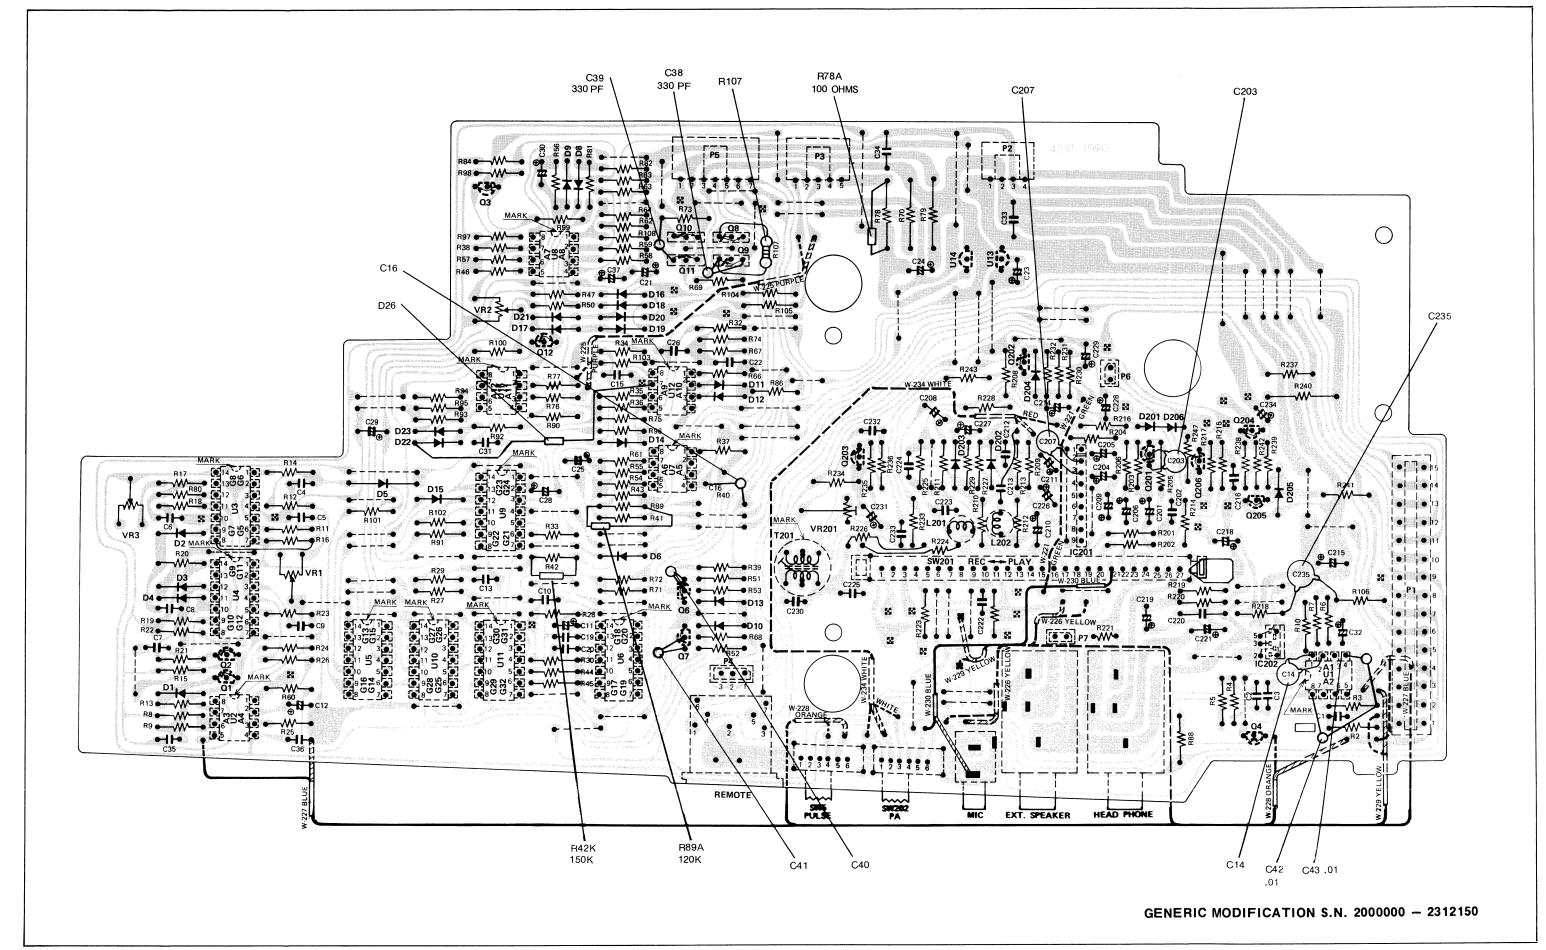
Tape Recorder PCB Assembly - Top View (*Generic Modification)
